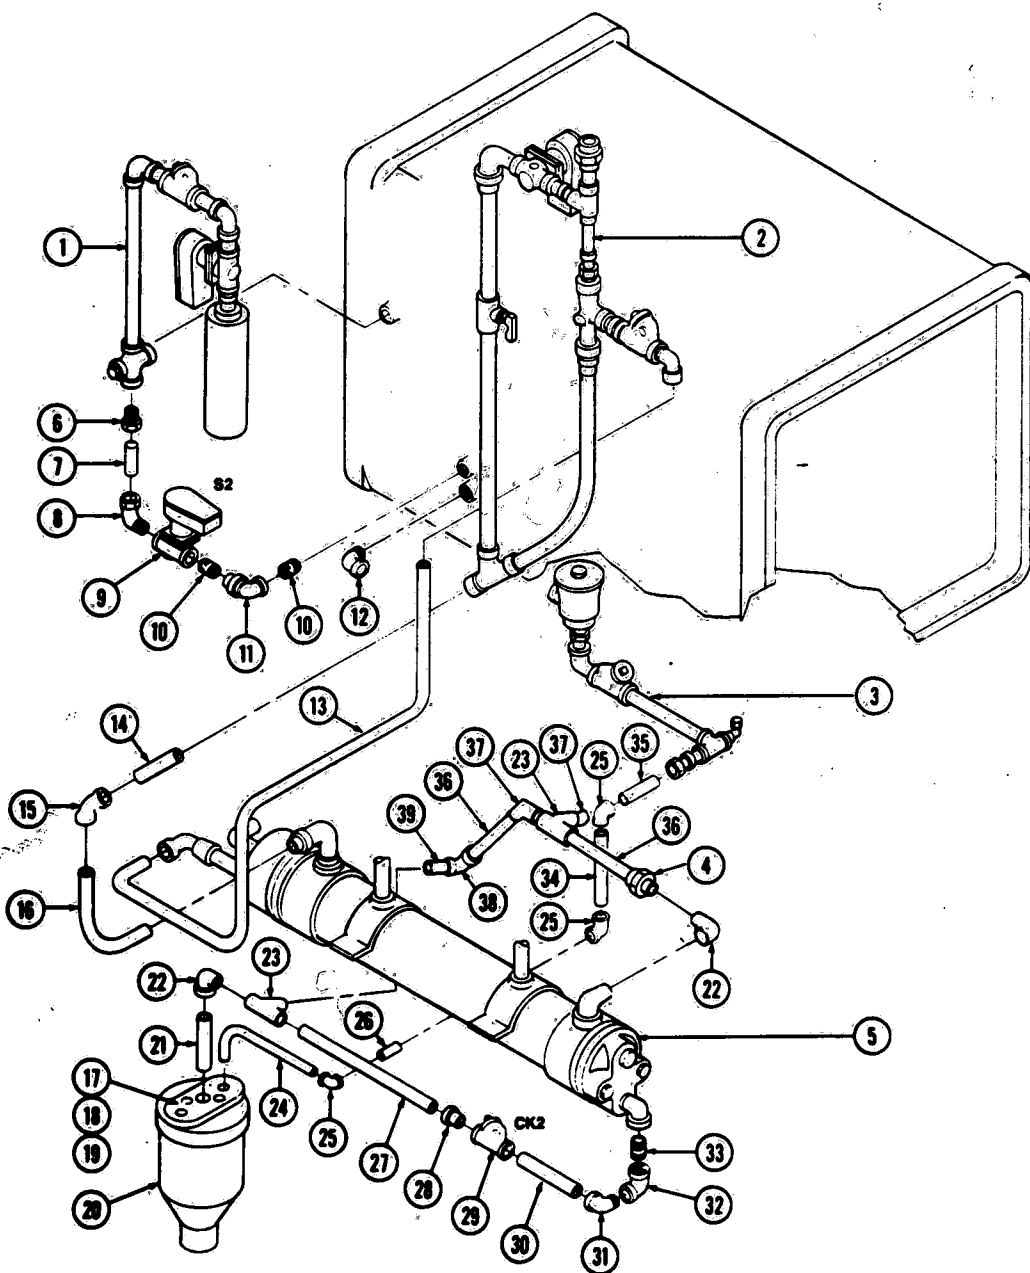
PIPING SUBASSEMBLY, Side - Vacumatic
